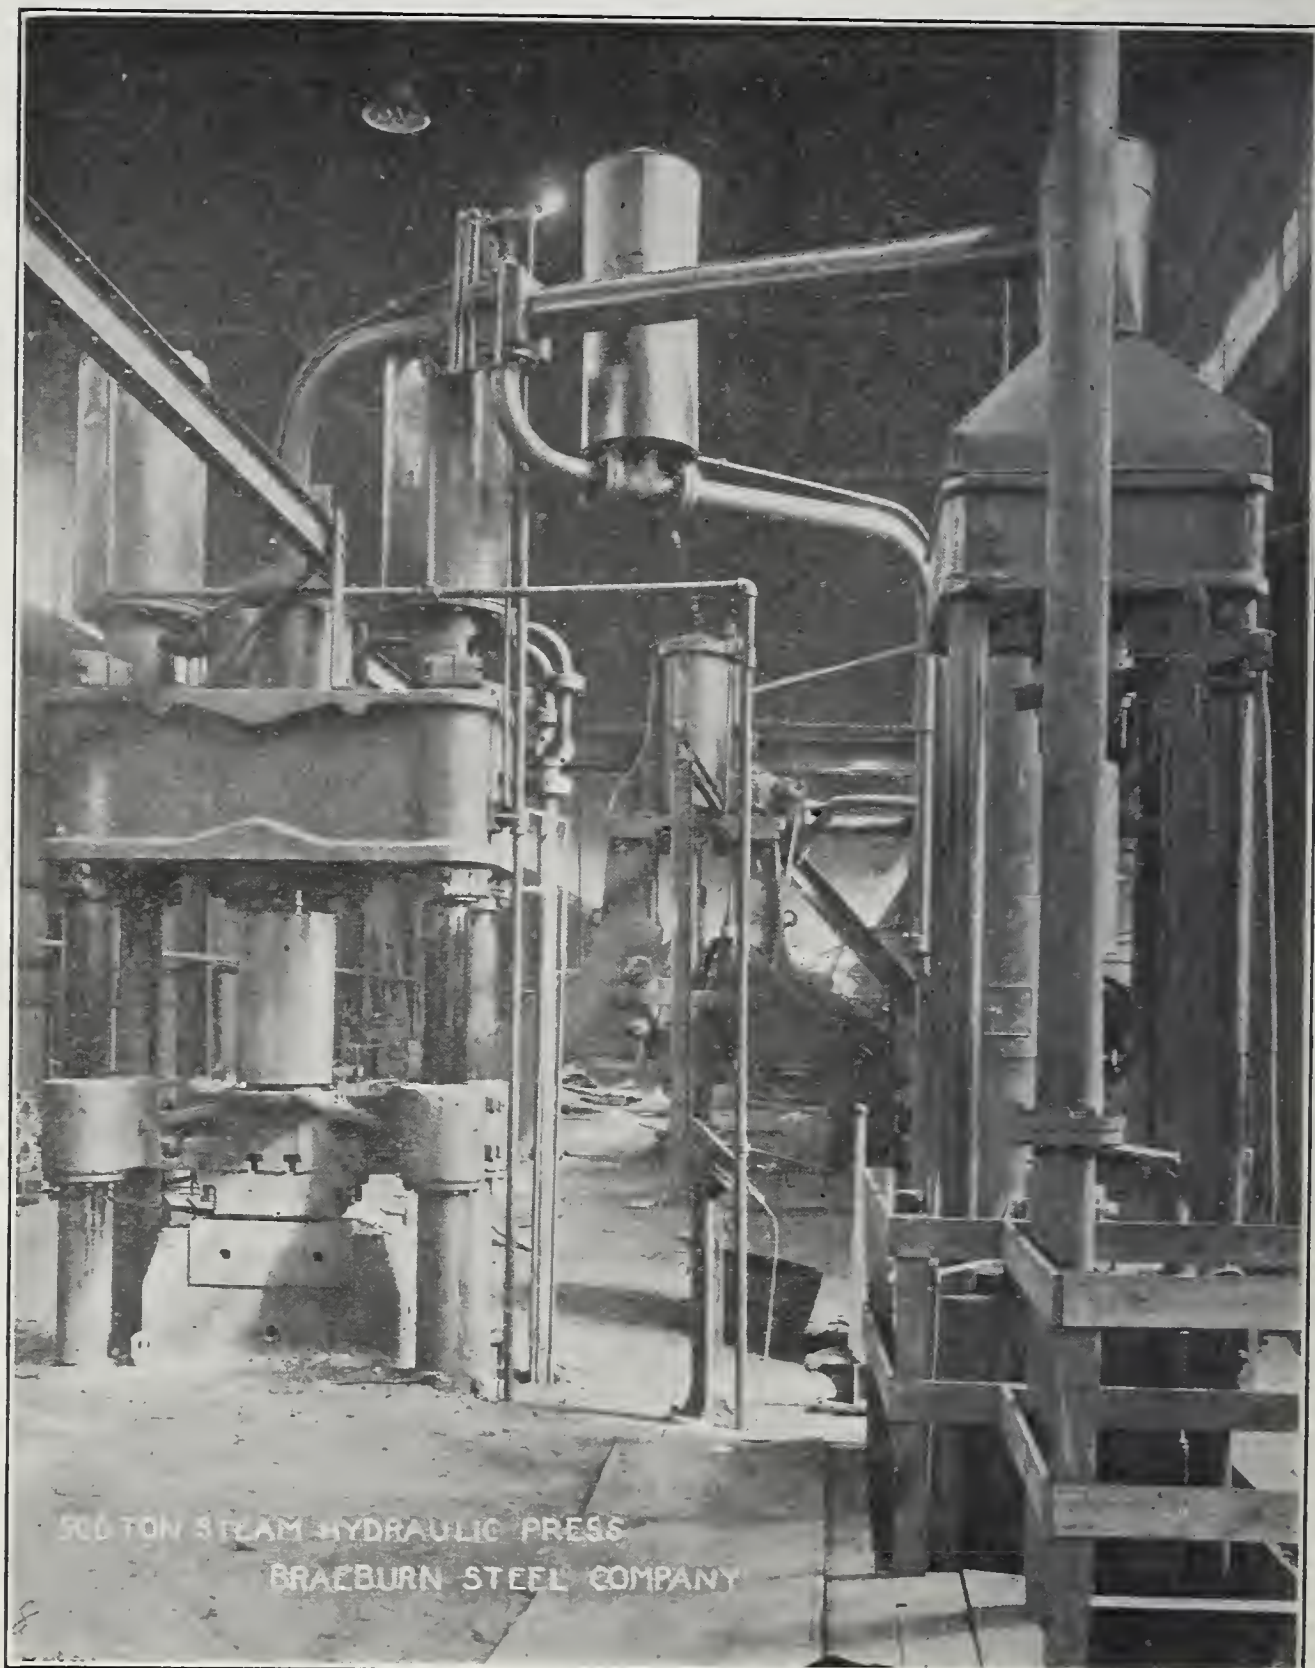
A 500-Ton Steam Hydraulic Forging Press.
